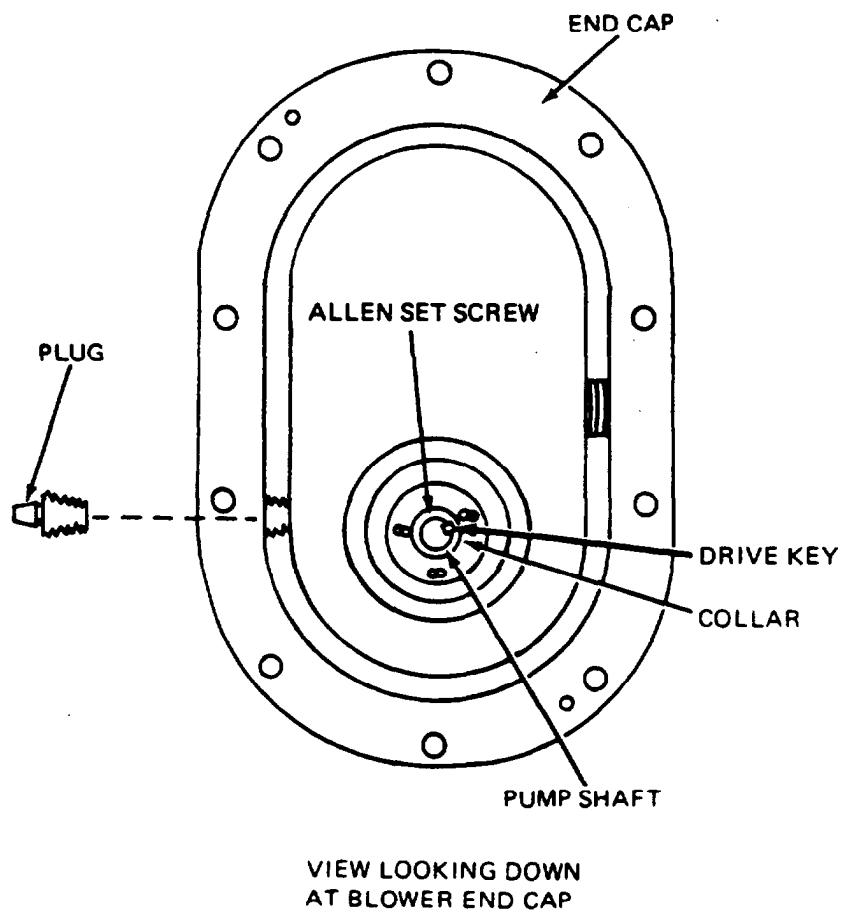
Disassemble/Reassemble Blow Assembly (Sheet 2 of 2).
